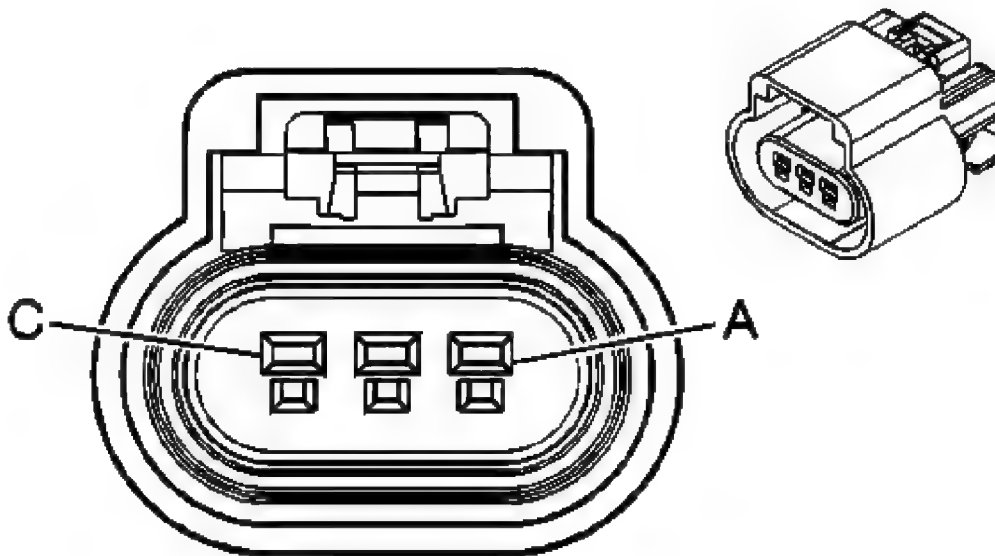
Inflatable Restraint Passenger Seat Belt Tension Retractor Sensor Connector End View
